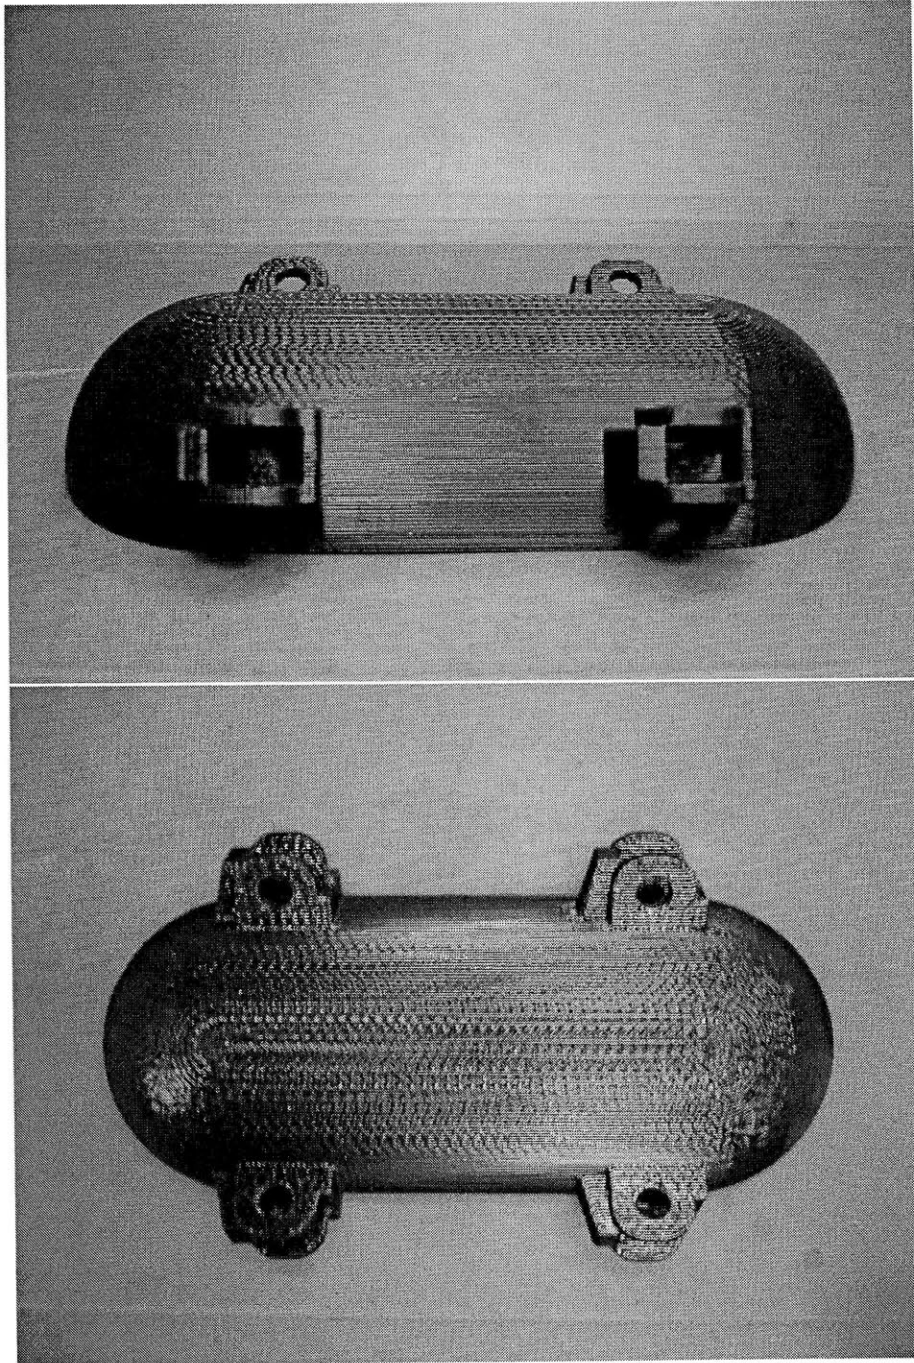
The 3D printed prototype of the lower part of the external hull. Material is ABS plastic.
